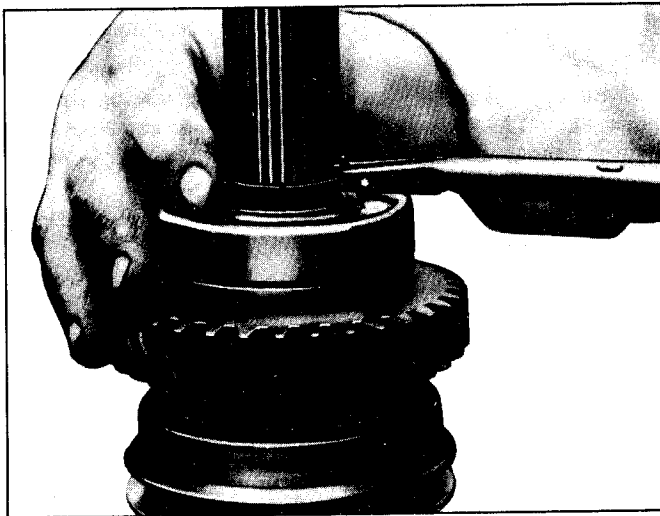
B-11K--Removing Rear Bearing Snap Ring
